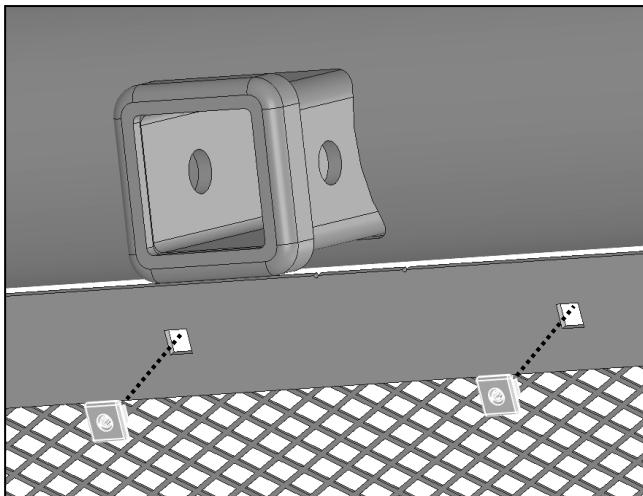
Bumper Secured to Frame Bracket and Support Bracket
